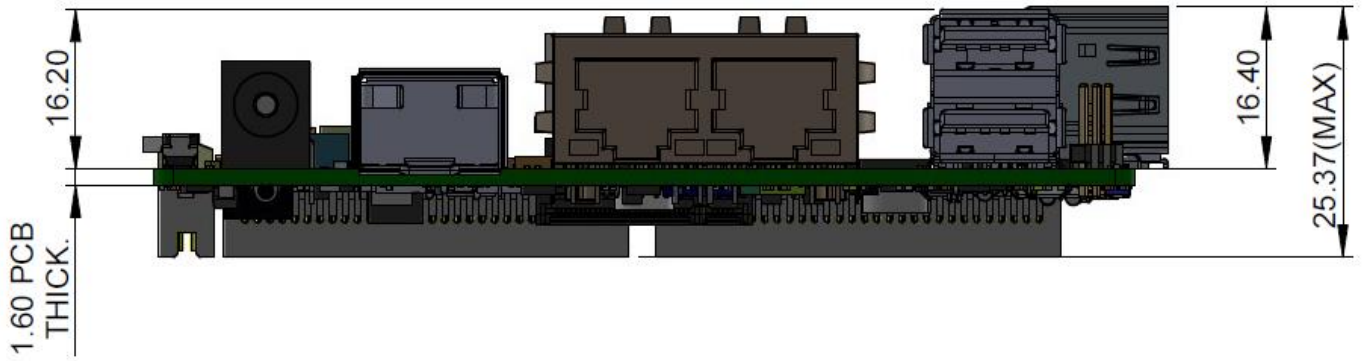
Mechanical dimension of Zynq Ultrascale+ MPSoC SBC - Side View
